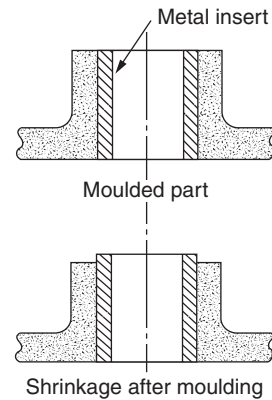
A metal insert moulded around a plastic part should be provided with proper undercuts in order to hold the plastic and metal together.
